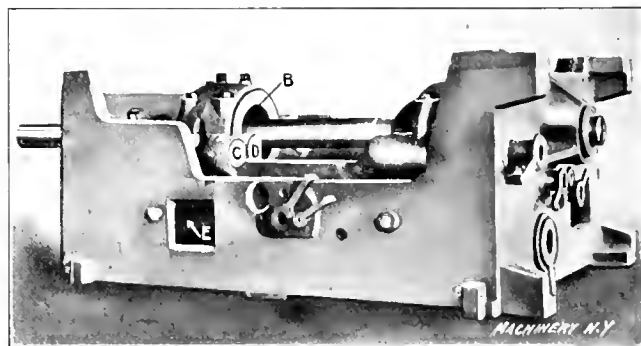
Another View of the Jig in Fig. 132. Note that Holes are drilled or bored from All Sides.
